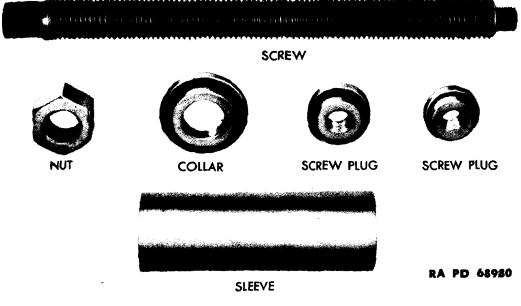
Spring Pin and Bushing — Remover and Replacer
